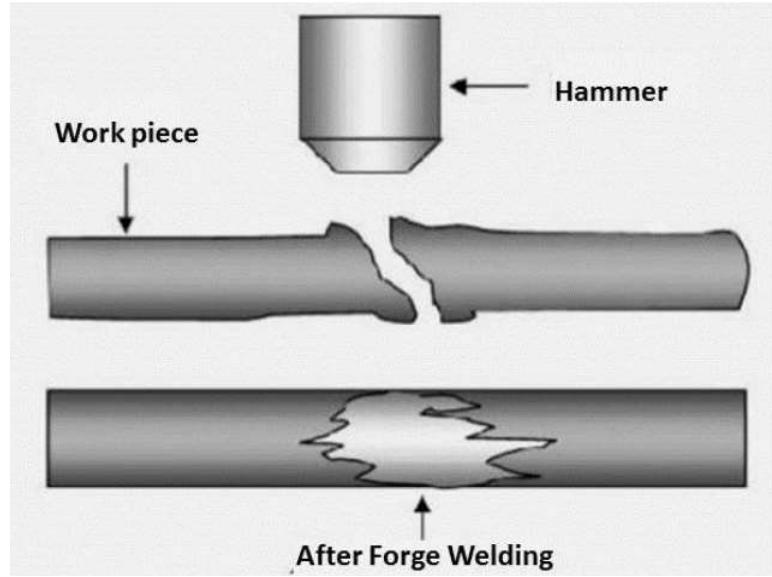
Schematic representation of forge welding using hammer
